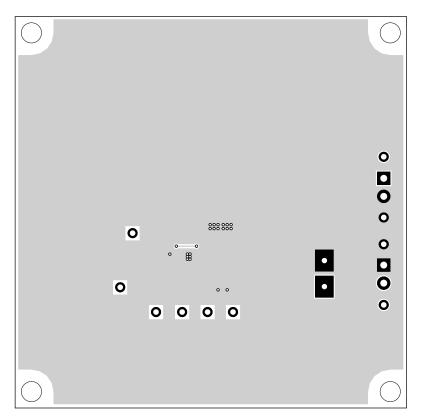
TPS5401EVM-708 Bottom-Side Layout
